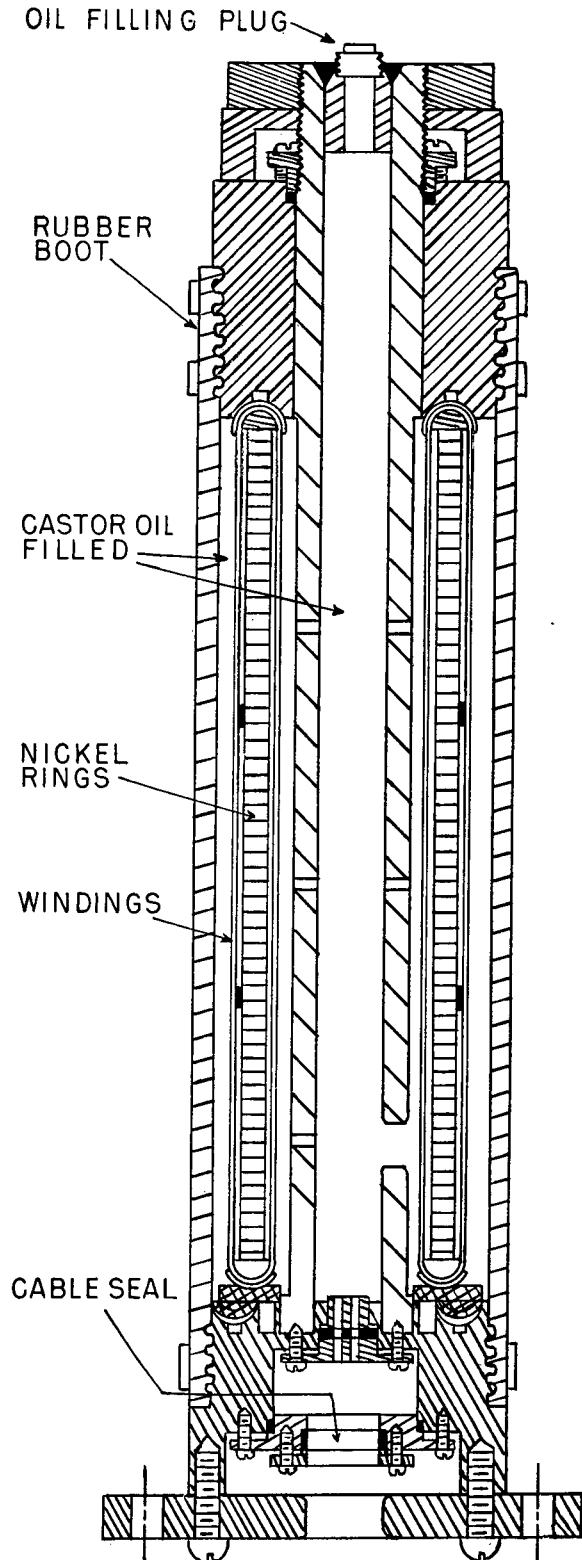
Assembly cross section of 28-kc ring-stack transducer.
